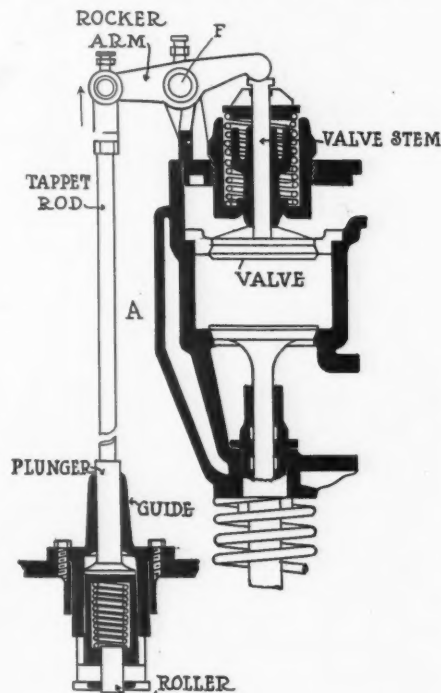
OPERATION OF VALVE MECHANISM IN VALVE-IN-THE-HEAD MOTOR
